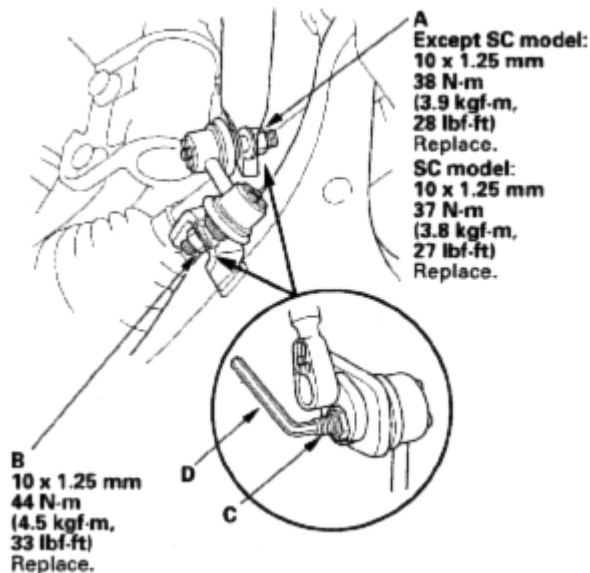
Tightening Self-Locking Nut And Flange Nut With Torque Specifications
